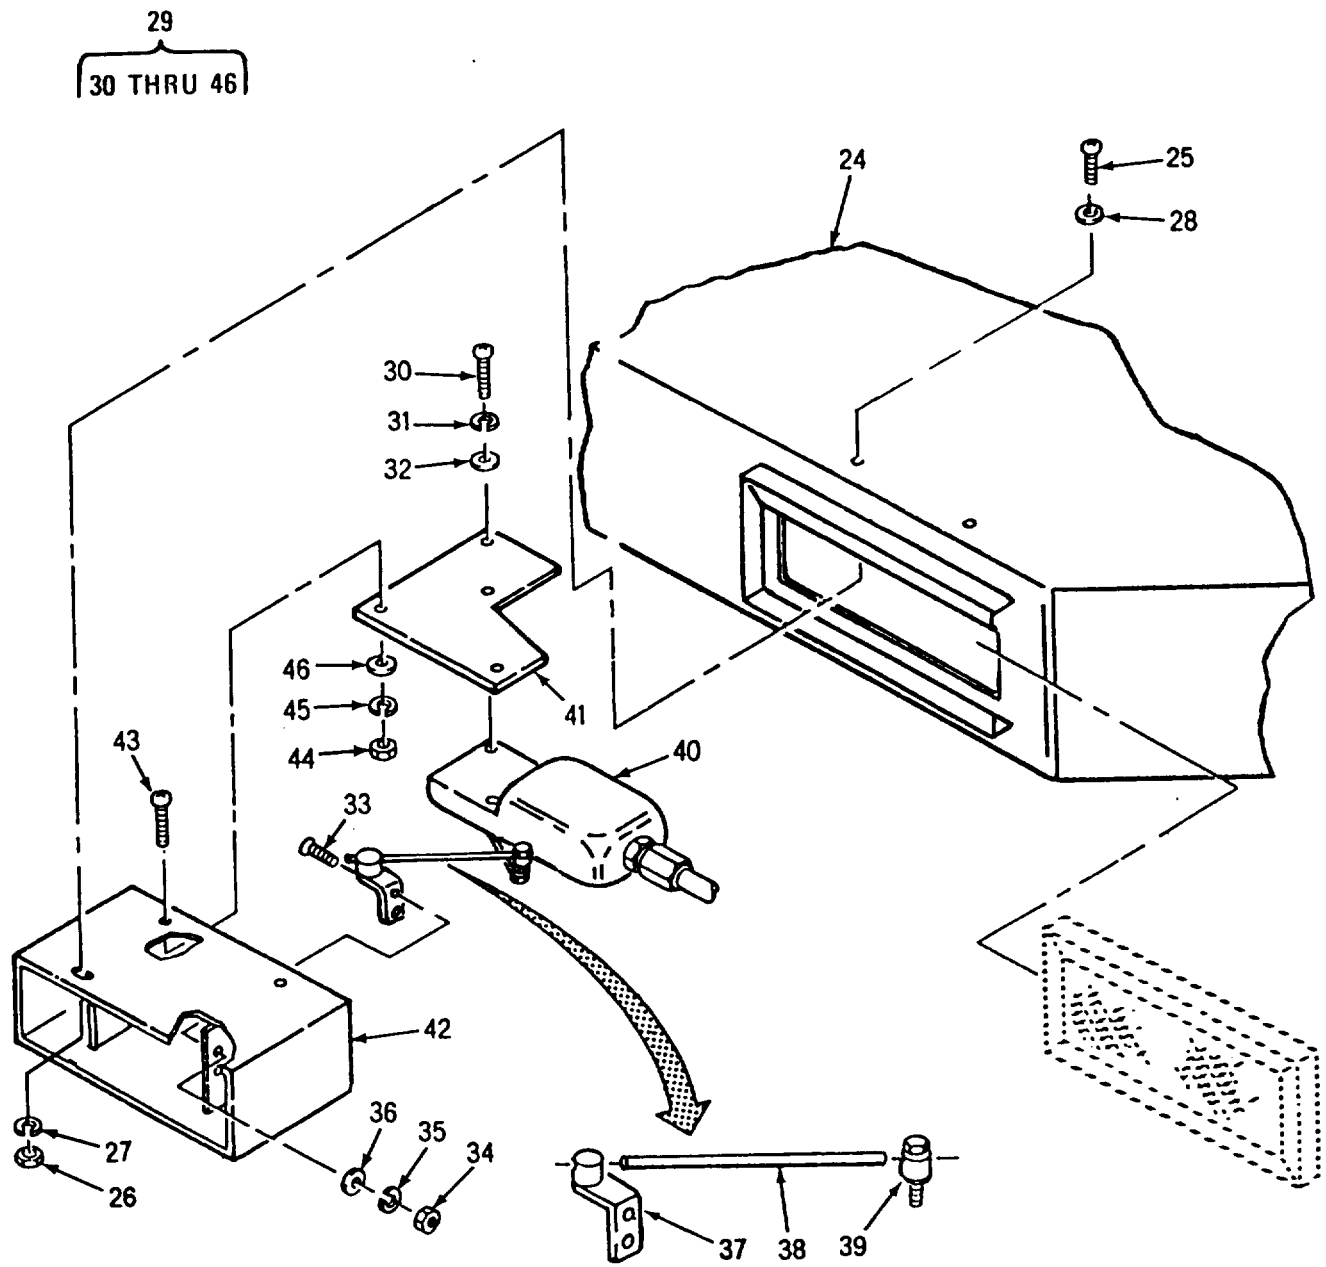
ECU Intake Damper Doors (Sheet 2 of 2)
